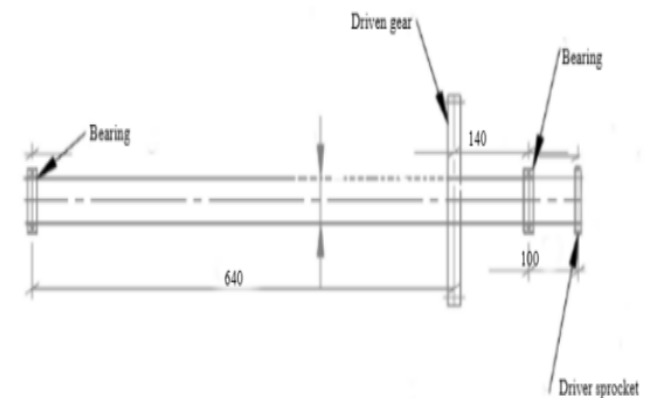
Output shaft with a driven gear, chain, driver sprocket and bearings
